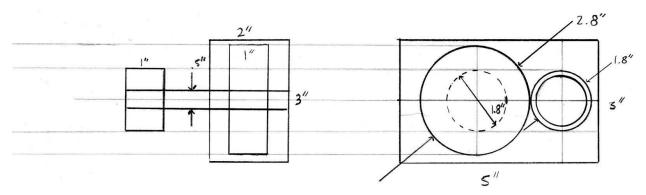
Approximate Layout and Dimensions for Hand Crank with Gears
